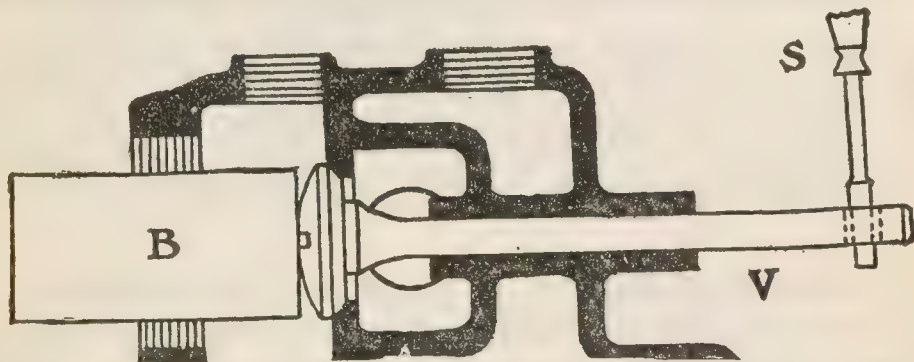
,113.—Method of grinding valves in horizontal cylinders. A block of steel B, is held against the head of the valve V, and the latter rotated on its seat by means of a screw driver blade S, inserted in the slot in the stem, the face having been previously trued by a truing tool. In cases where the stem of the valve has no slot, a pair of gas pliers can be used to grip it, being careful in so doing not to mutilate the threads thereon. The valve may be turned by a piece of steel wire inserted in the pin hole.
